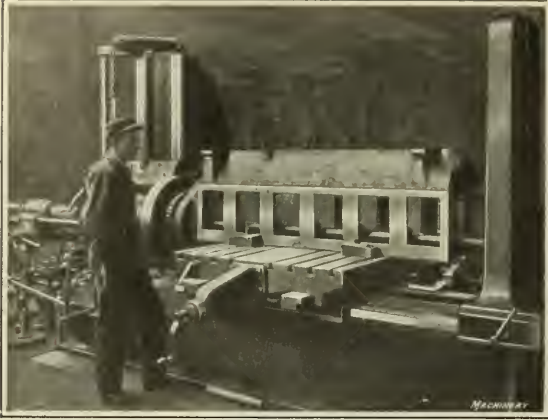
Lucas Horizontal Milling and Boring Machine boring Bearing for Six-cylinder, 120-horsepower Crank-cases
